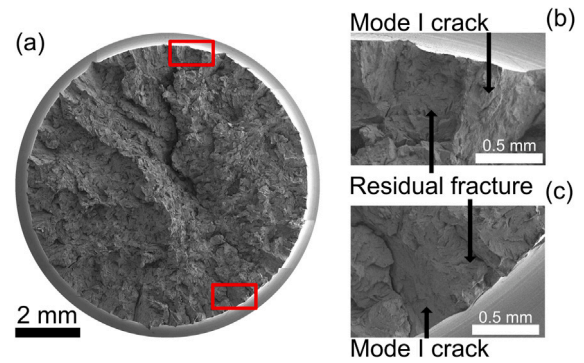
Representative fracture surface of predeformed test bars cyclically shear loaded along direction of predeformation without a static compressive axial load. (a) overview, (b) and (c) detailed view.
